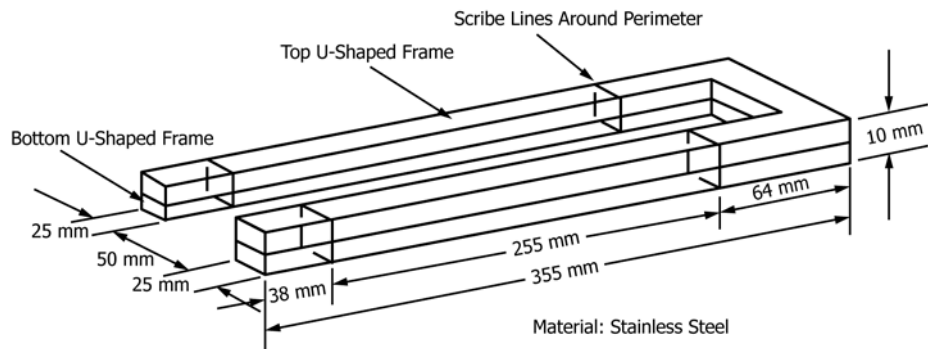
Typical Specimen Holder—Two Identical U-Shaped Frames
